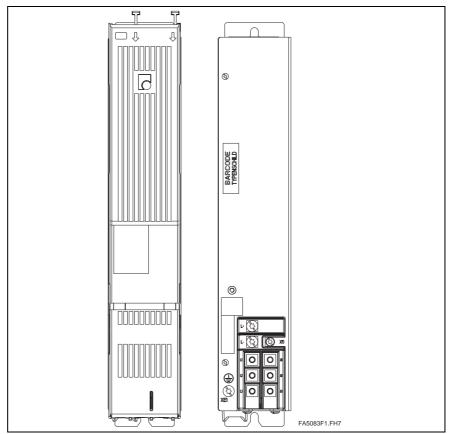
Front view of auxiliary capacitance module CZM01.3
